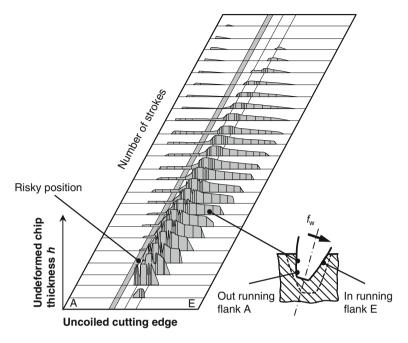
Cross-sections of undeformed chip during gear shaping of a tooth flank
